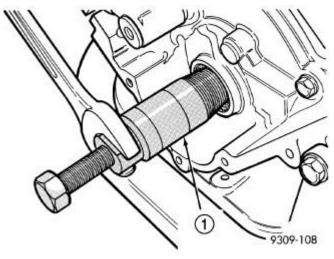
Crankshaft Oil Seal With Special Tool 6341A - Removal Courtesy of CHRYSLER LLC
